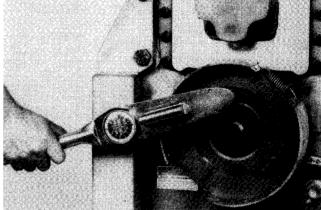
Position a new gasket on the idler shaft rear bearing cap, install bearing cap.
